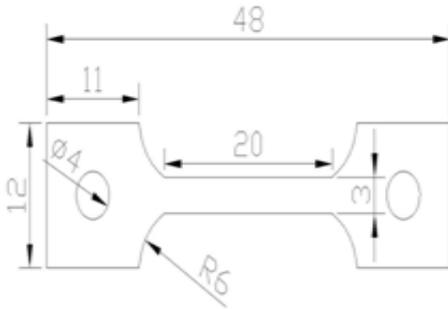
FIGURE II. DIMENSION OF TENSILE SPECIMEN.
